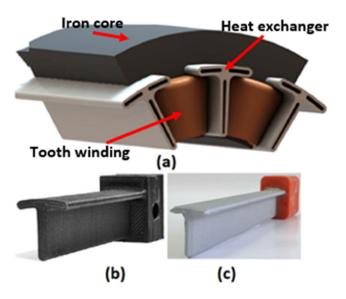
The concept designs of 3D-DWHX (a) the CAD design of stator and winding with the T shapes HEs, (b) CF-Nylon DWHX prototype (c) PC-AL DWHX prototype [35]–[37].
